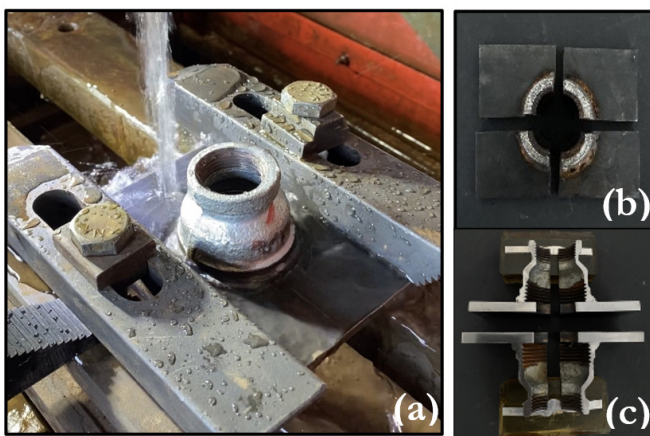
(a) Wire cut machine cutting workpieces, (b) specimen, and (c) specimen after polishing.
